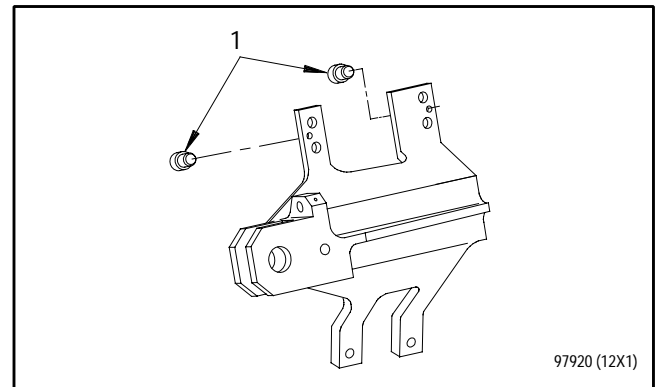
Rear Compressor Stator Linkage Arm Bracket Assembly - Pin Replacement
